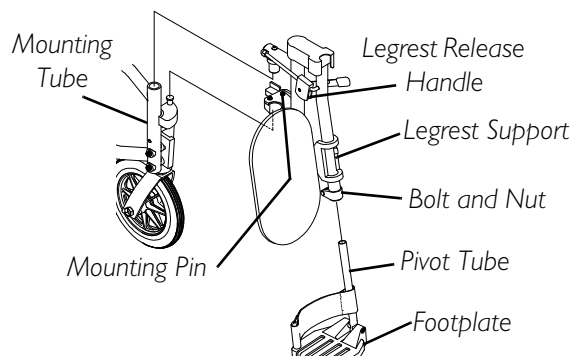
INSTALLING/REMOVING ELEVATING LEGREST
